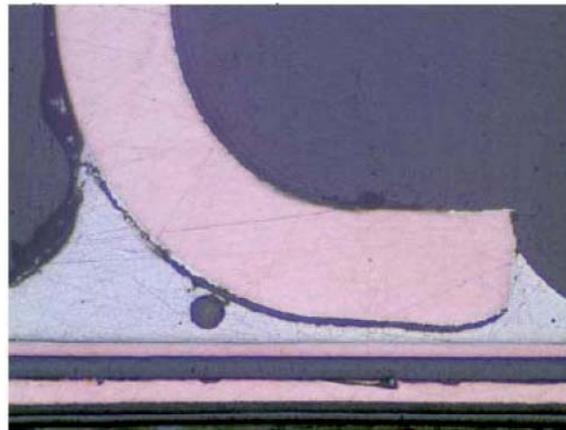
Early wearout failure of SnPb plated component soldered with SAC alloy
